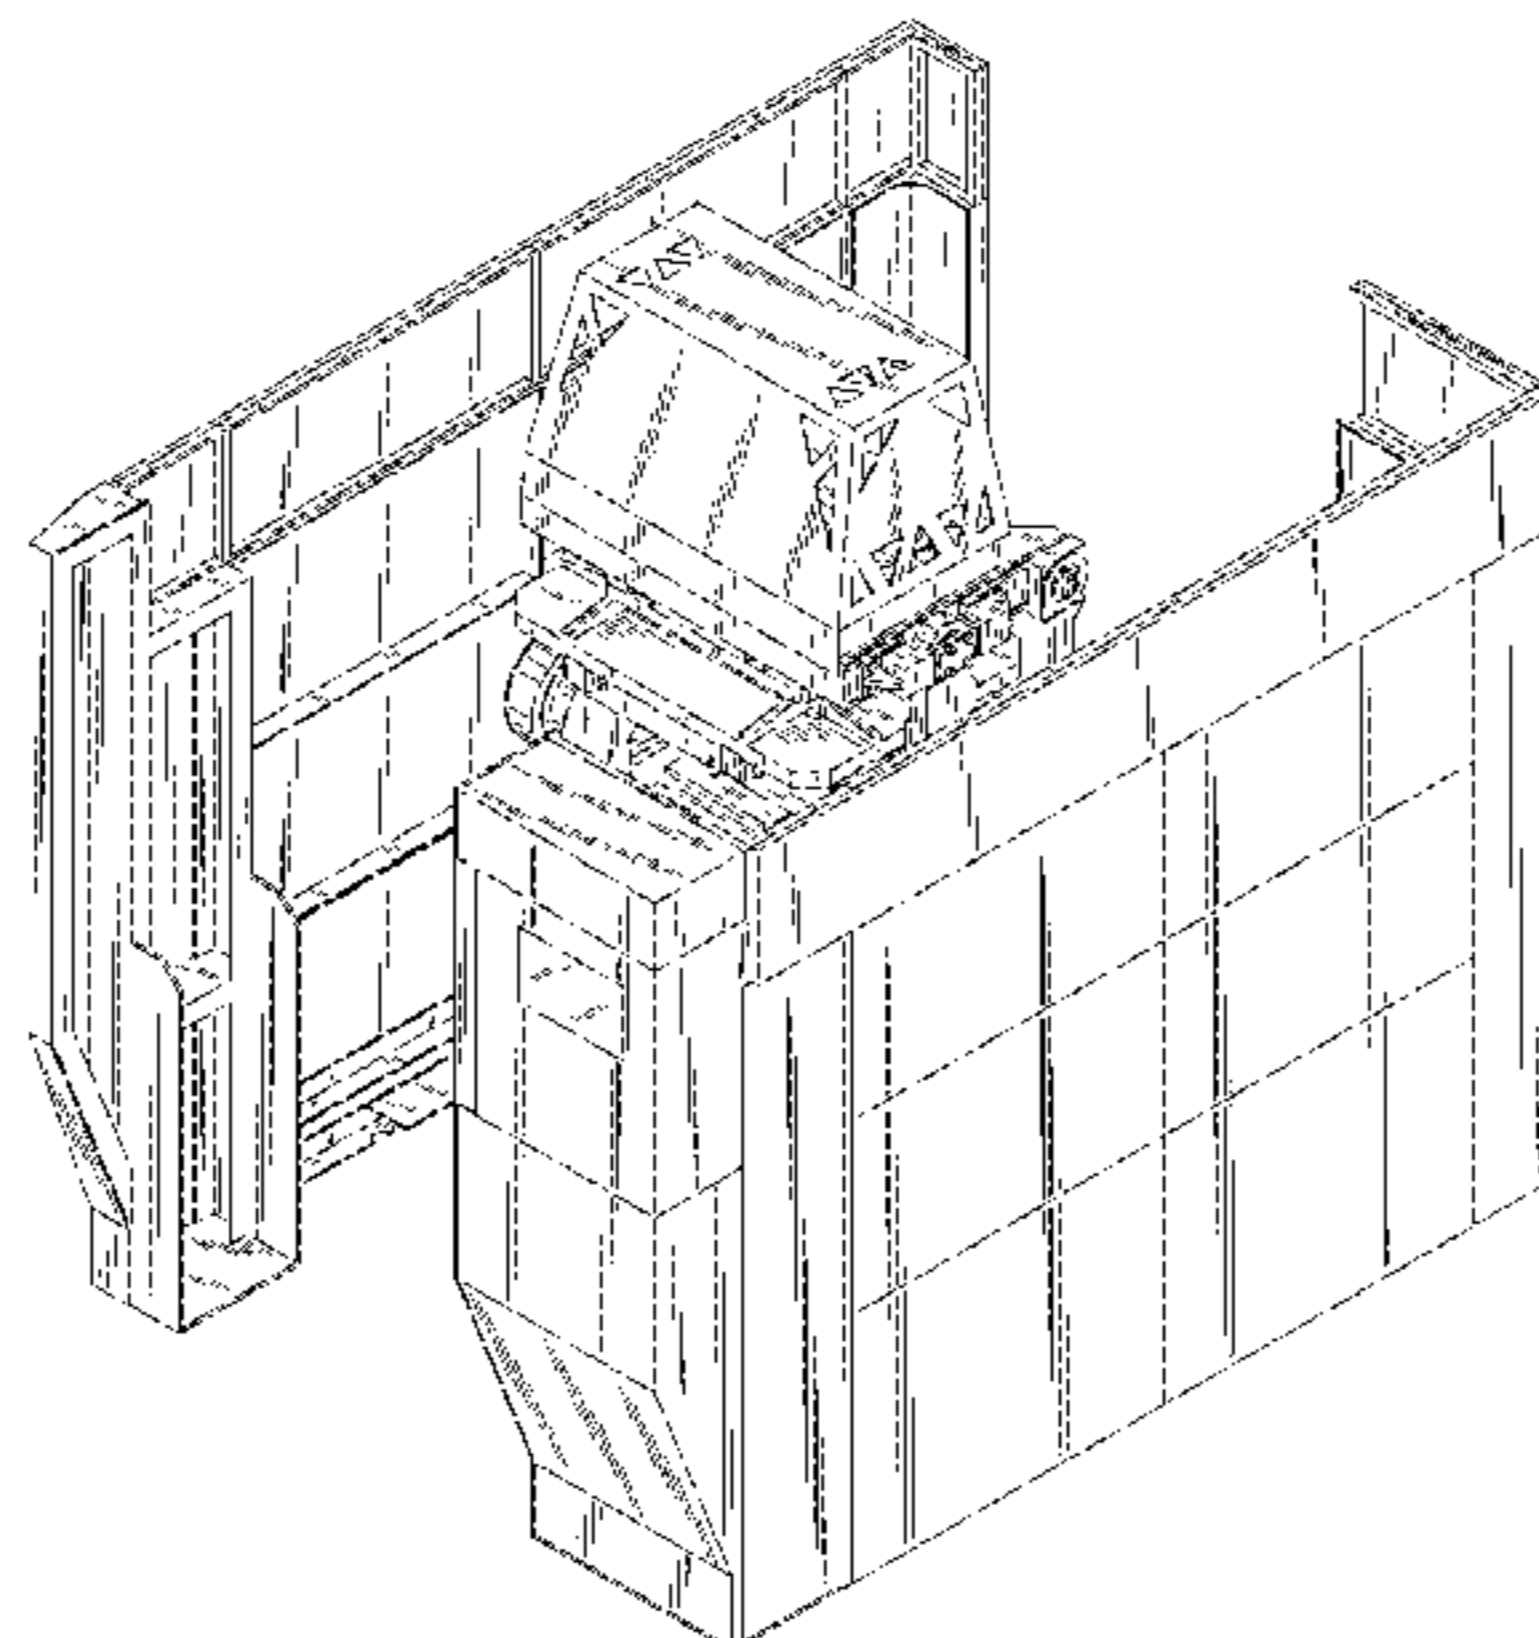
is a perspective view of the main body portion of the casting machine of FIG. 1, which is equivalent to the perspective view of the casting machine of FIG. 1 without the surrounding wall portions, showing the lower mold portion moved forward and shown removed for clarity of disclosure.
